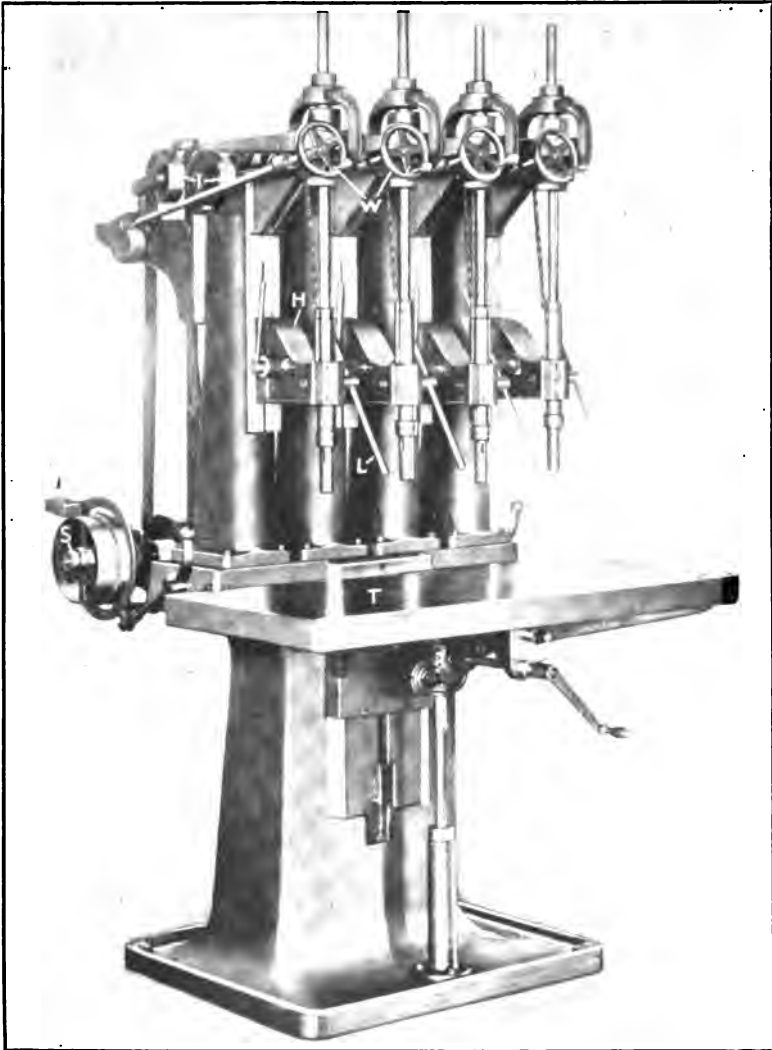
Henry & Wright Multiple-spindle Drilling Machine
